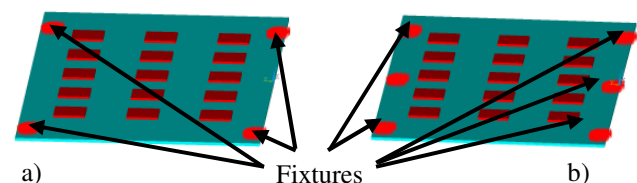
PCB fixture conditions: a) 4-screws fixture according to JEDEC standard; b) 6-screws fixture with additional fixture at the PCB center
